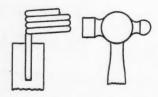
By Inserting the Loop into a Groove in the Block and Striking with a Hammer, the Loop is Twisted to a Central Position
